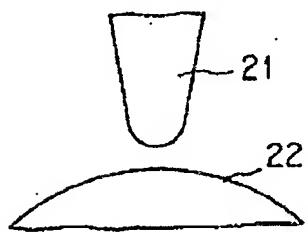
Model Enlarge Side View Diagram that Shows the Sheet Welding and Cutting Position for a Prior Art Example.
